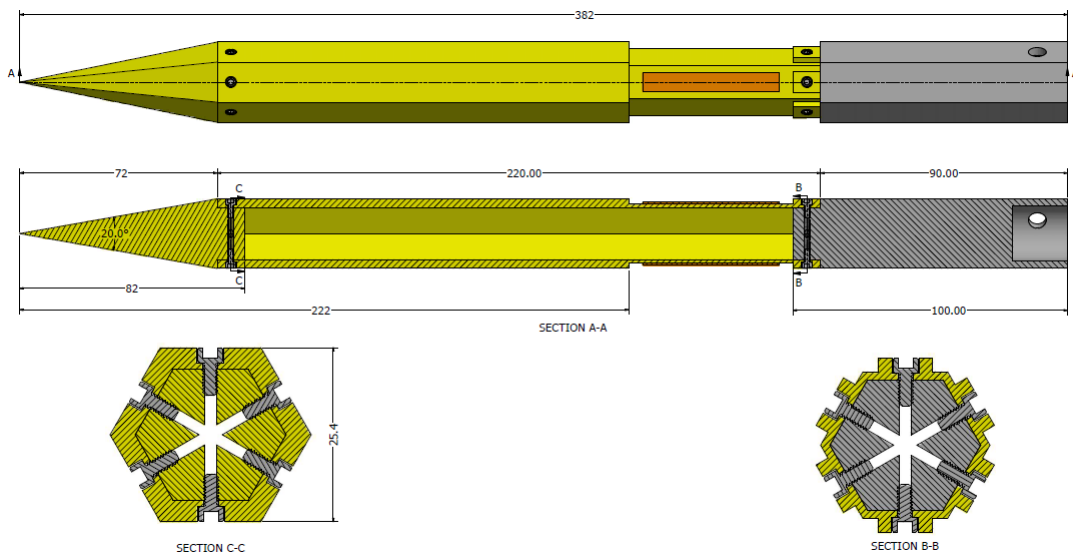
Hex probe detail drawing (all dimensions are in mm)
